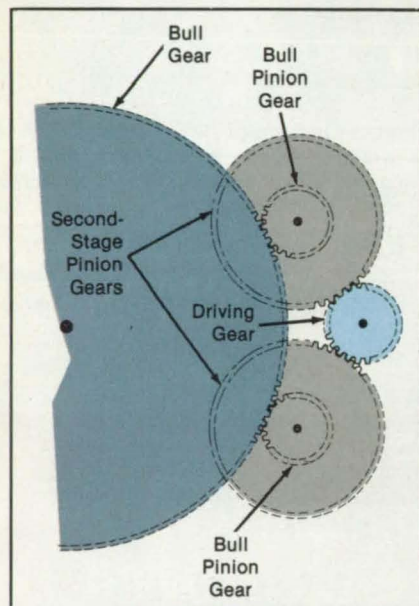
This Load-Sharing Scheme functions as intended only when all gears are perfectly sized, shaped, and aligned. The slightest deviation in machining tolerance can cause one pinion to transmit the entire torque load while the other essentially freewheels.
